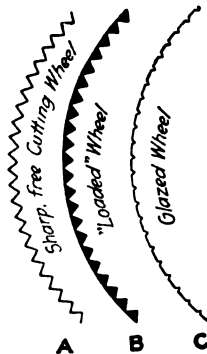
THINK OF THE GRINDING WHEEL AS A CIRCULAR SAW
